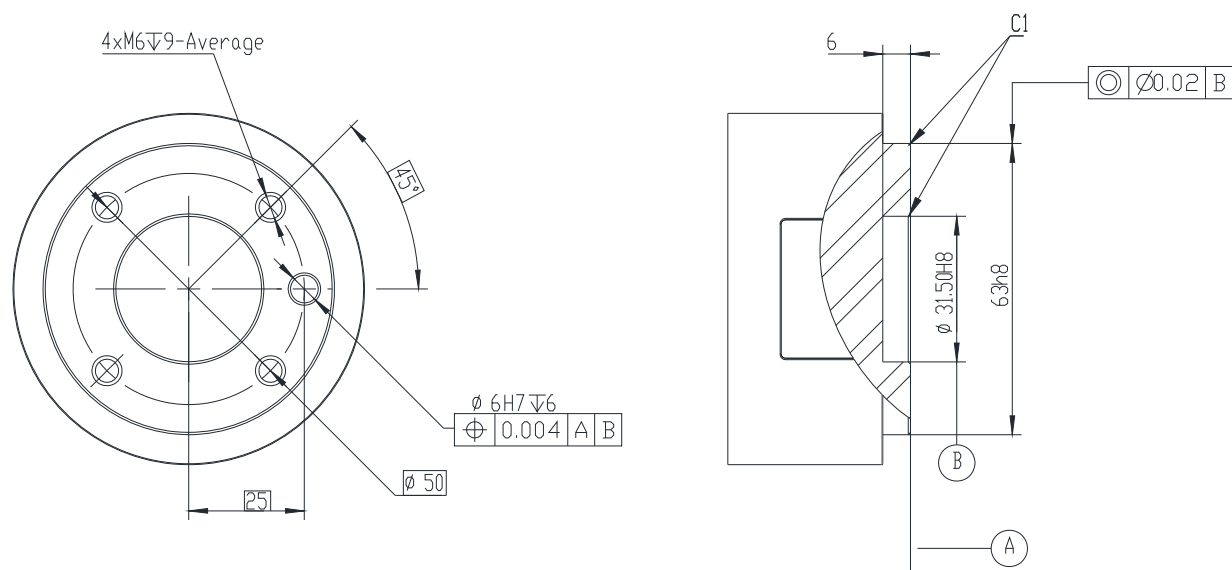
Mechanical dimensions diagram of the tool flange of the robot, with unit of mm
